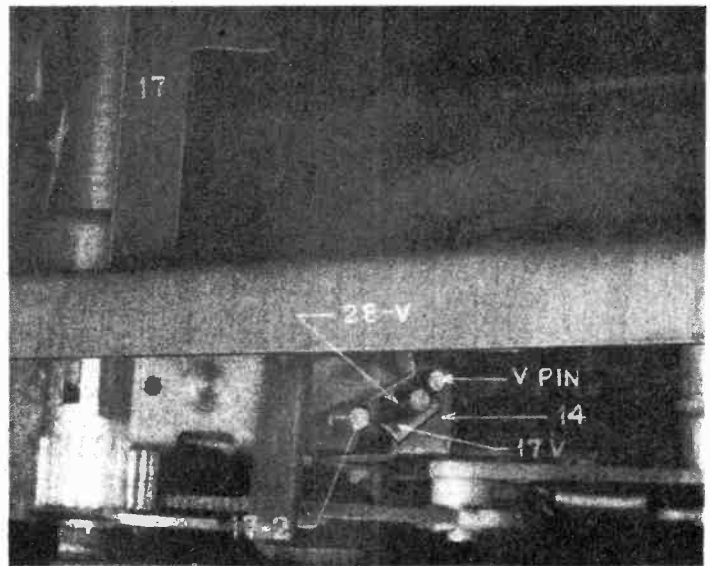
The lever 17 is in the vertical (10-inch) position. Pin V, on the turned-up end of 14 (see Fig. 14), passing above the latch pawl 17-V, on lower end of 17, as it nears upper step A on 17 just before pick-up is lowered onto record edge near the end of the cycle. See Fig 16.
